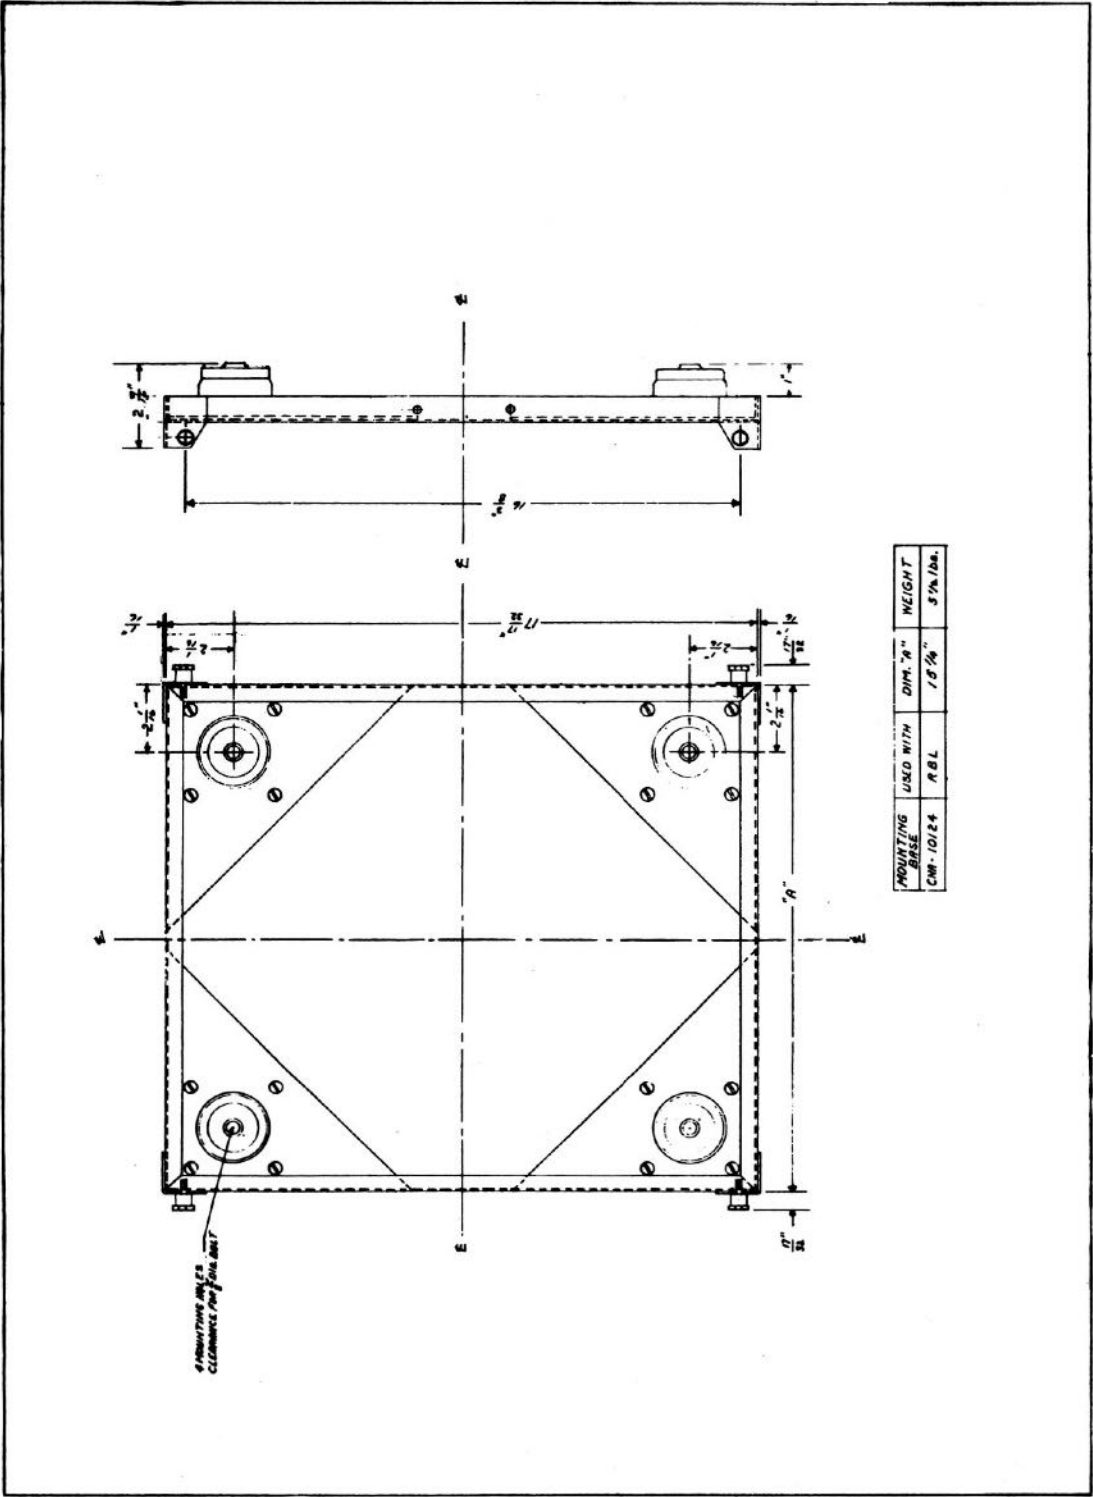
Outline Drawing of Type CNA-10124 Mounting Base
